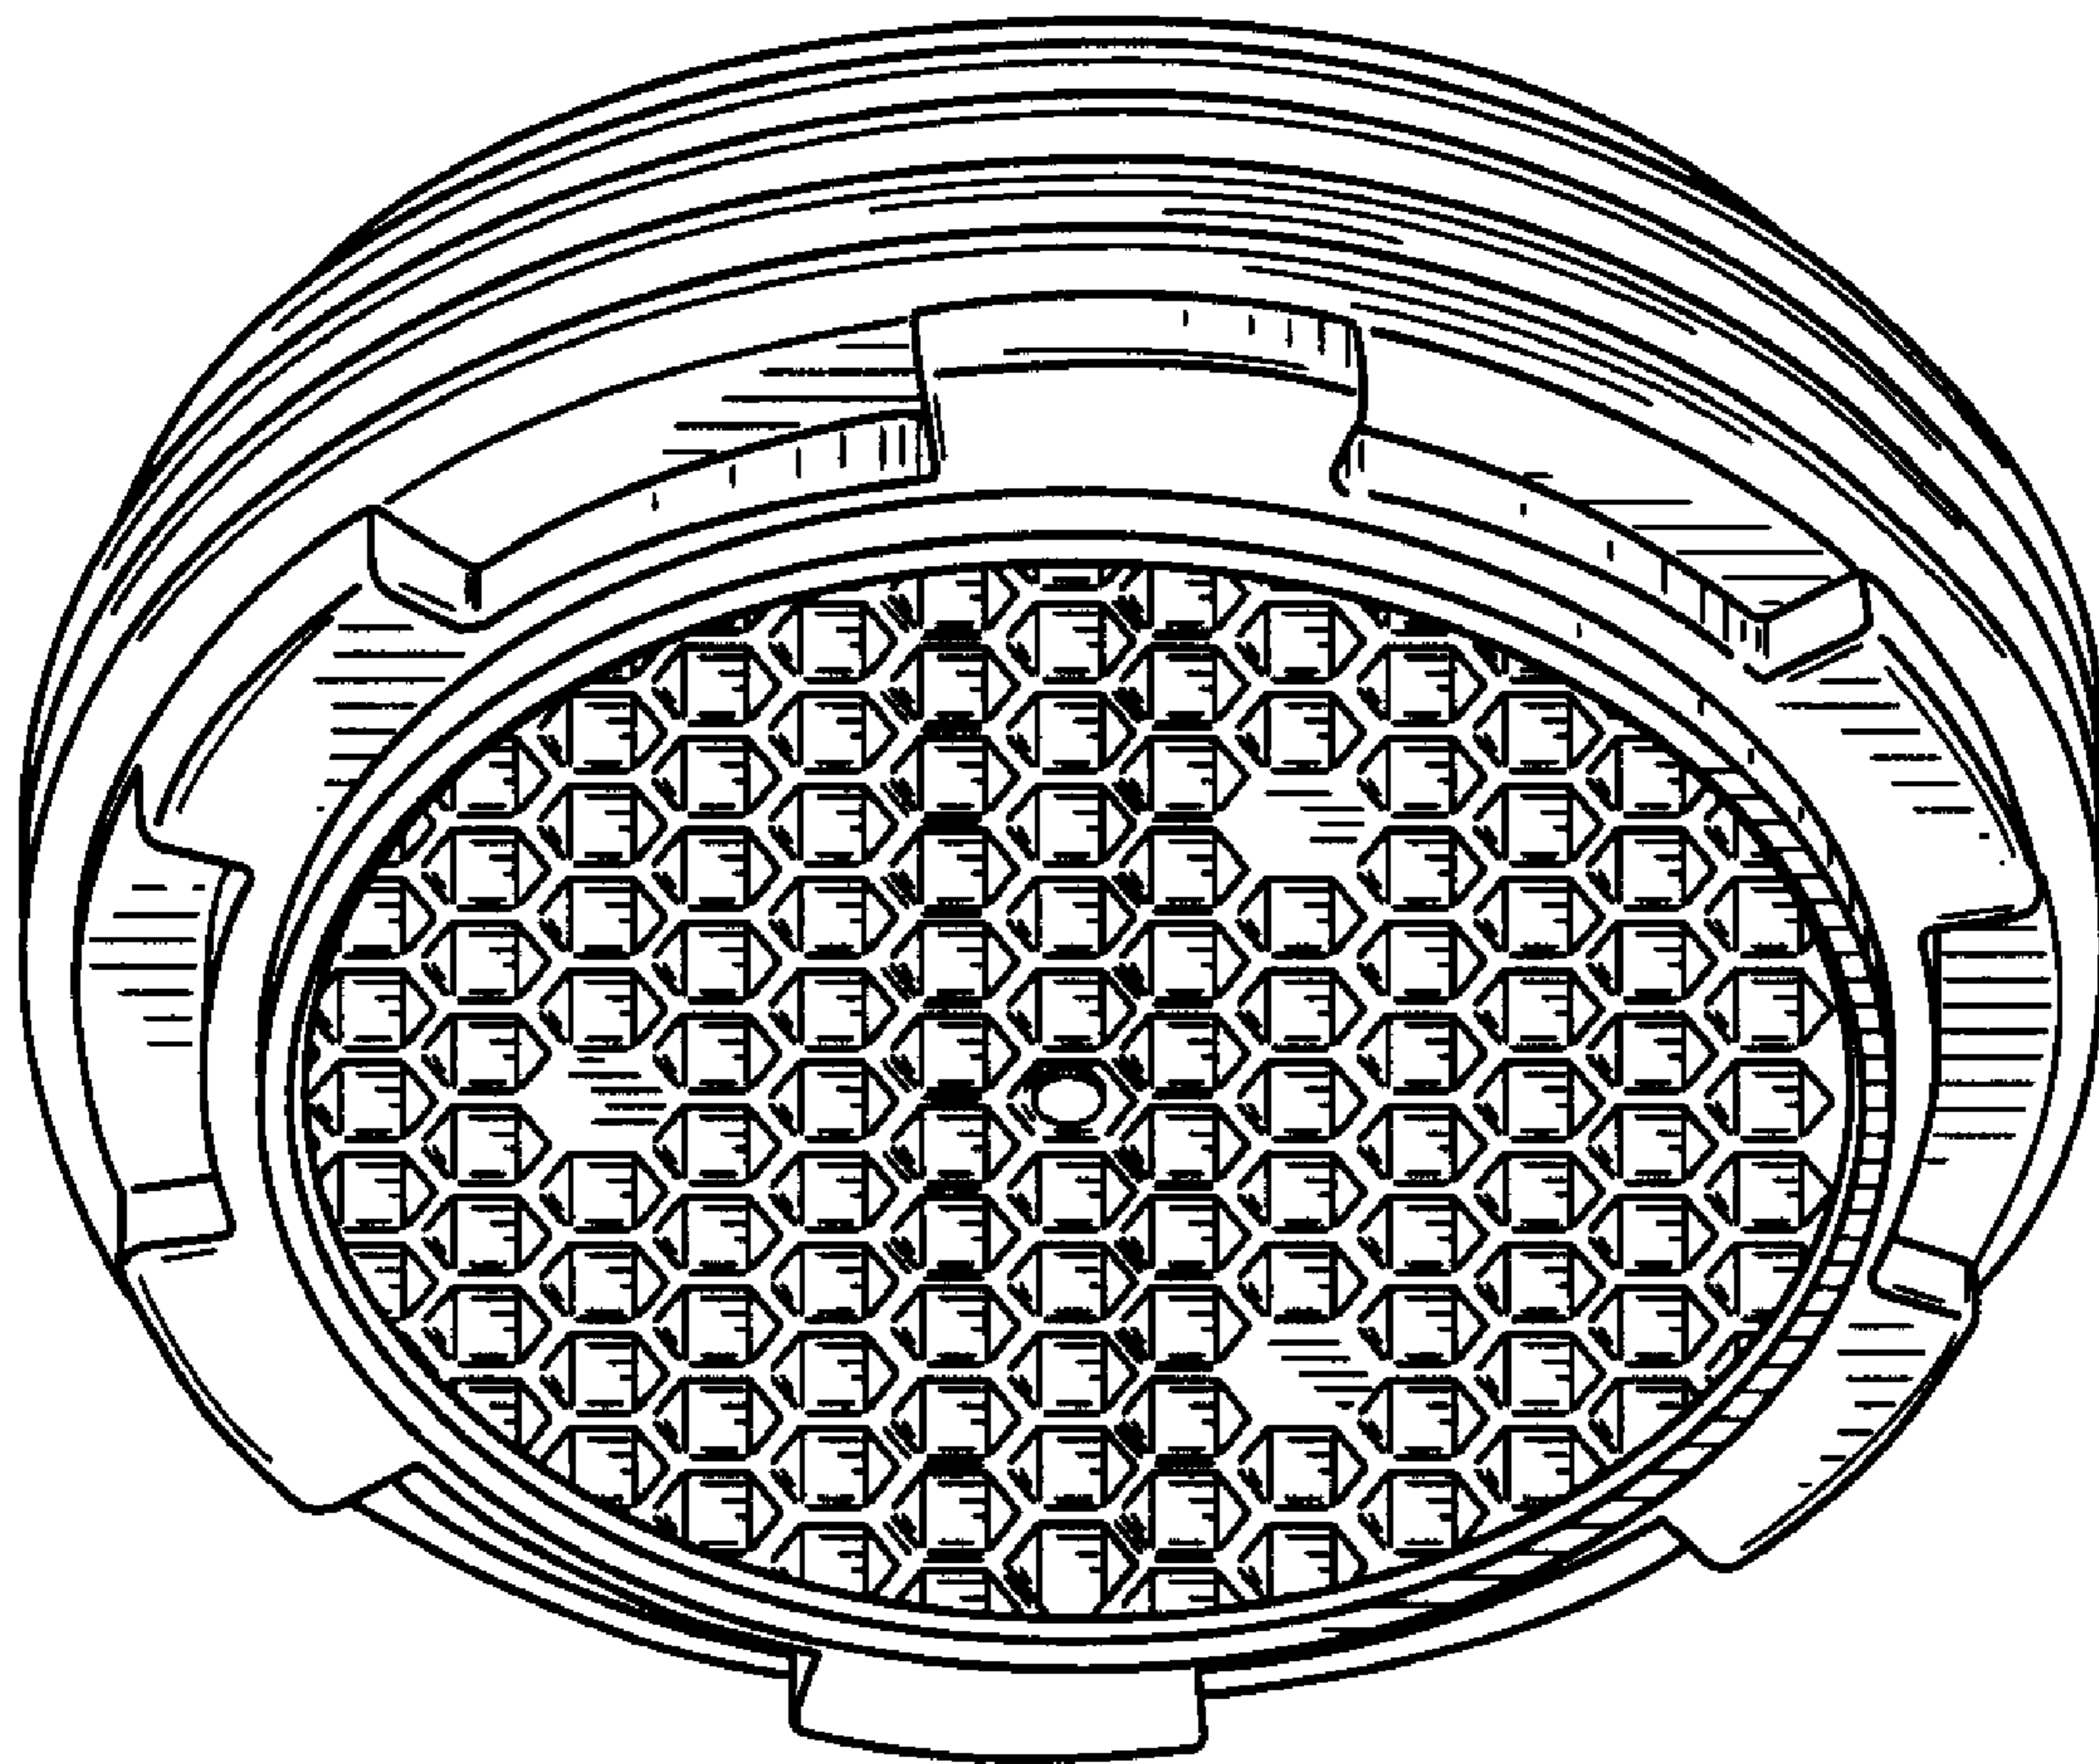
is a top perspective view of a flow straightener showing my new design;
